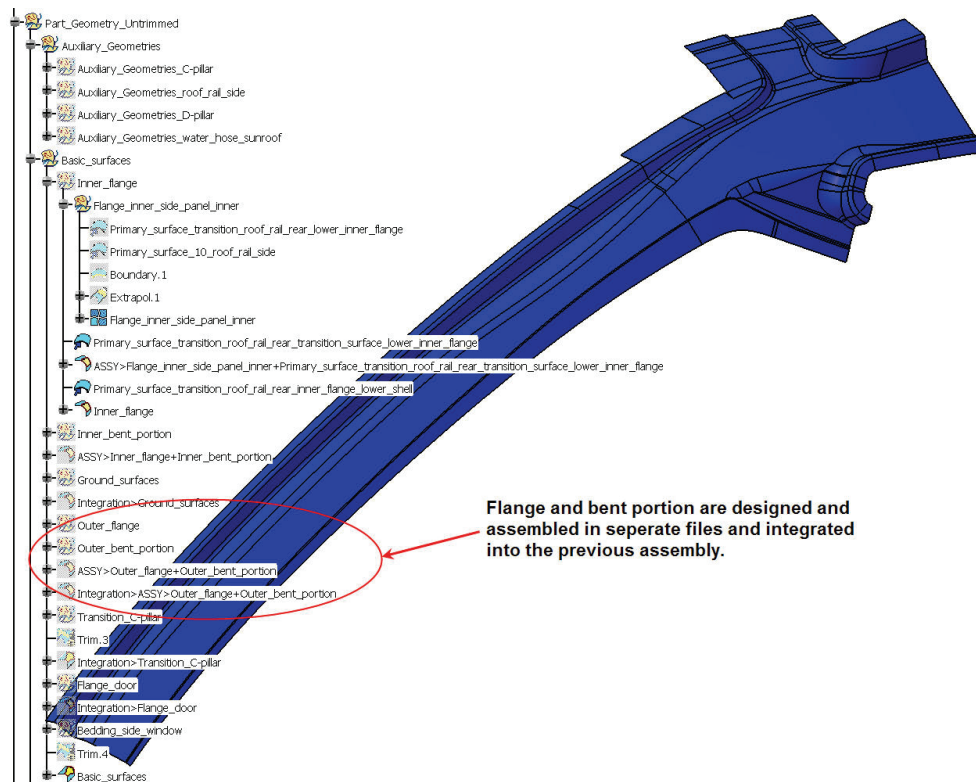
Basic surface assembly of inner panel rear joint sidewall upper (acc. to Bode et al, 2010)
